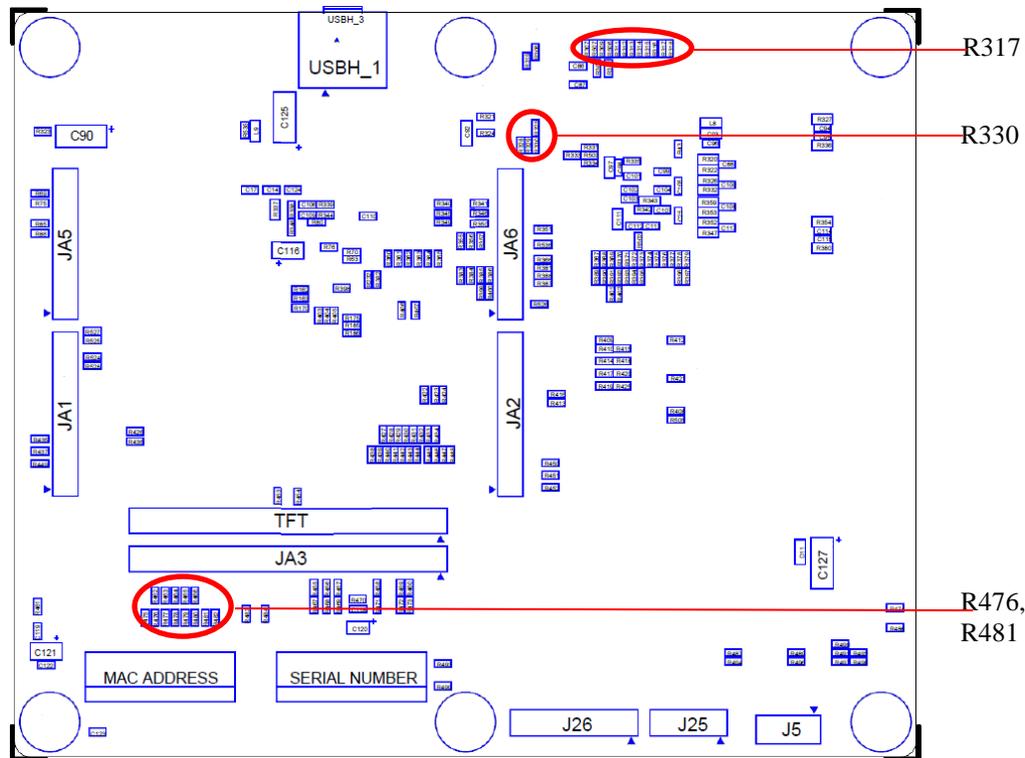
Locations of Setting Changes (Component Arrangement Diagram: Solder Side/Back Side)
